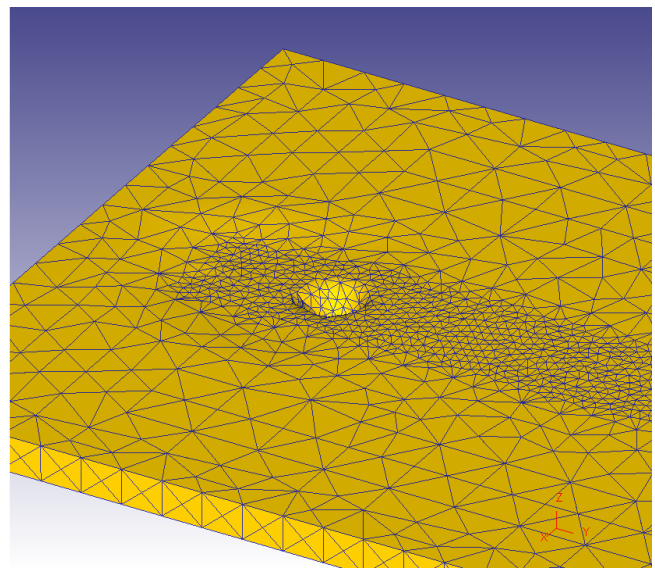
Sketch of the continuum sheet model at the beginning of the welding stage.
